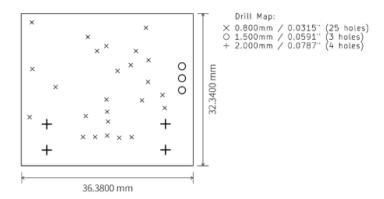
Fabrication drawing (drill drawing view) of the Peltier Slave module.
